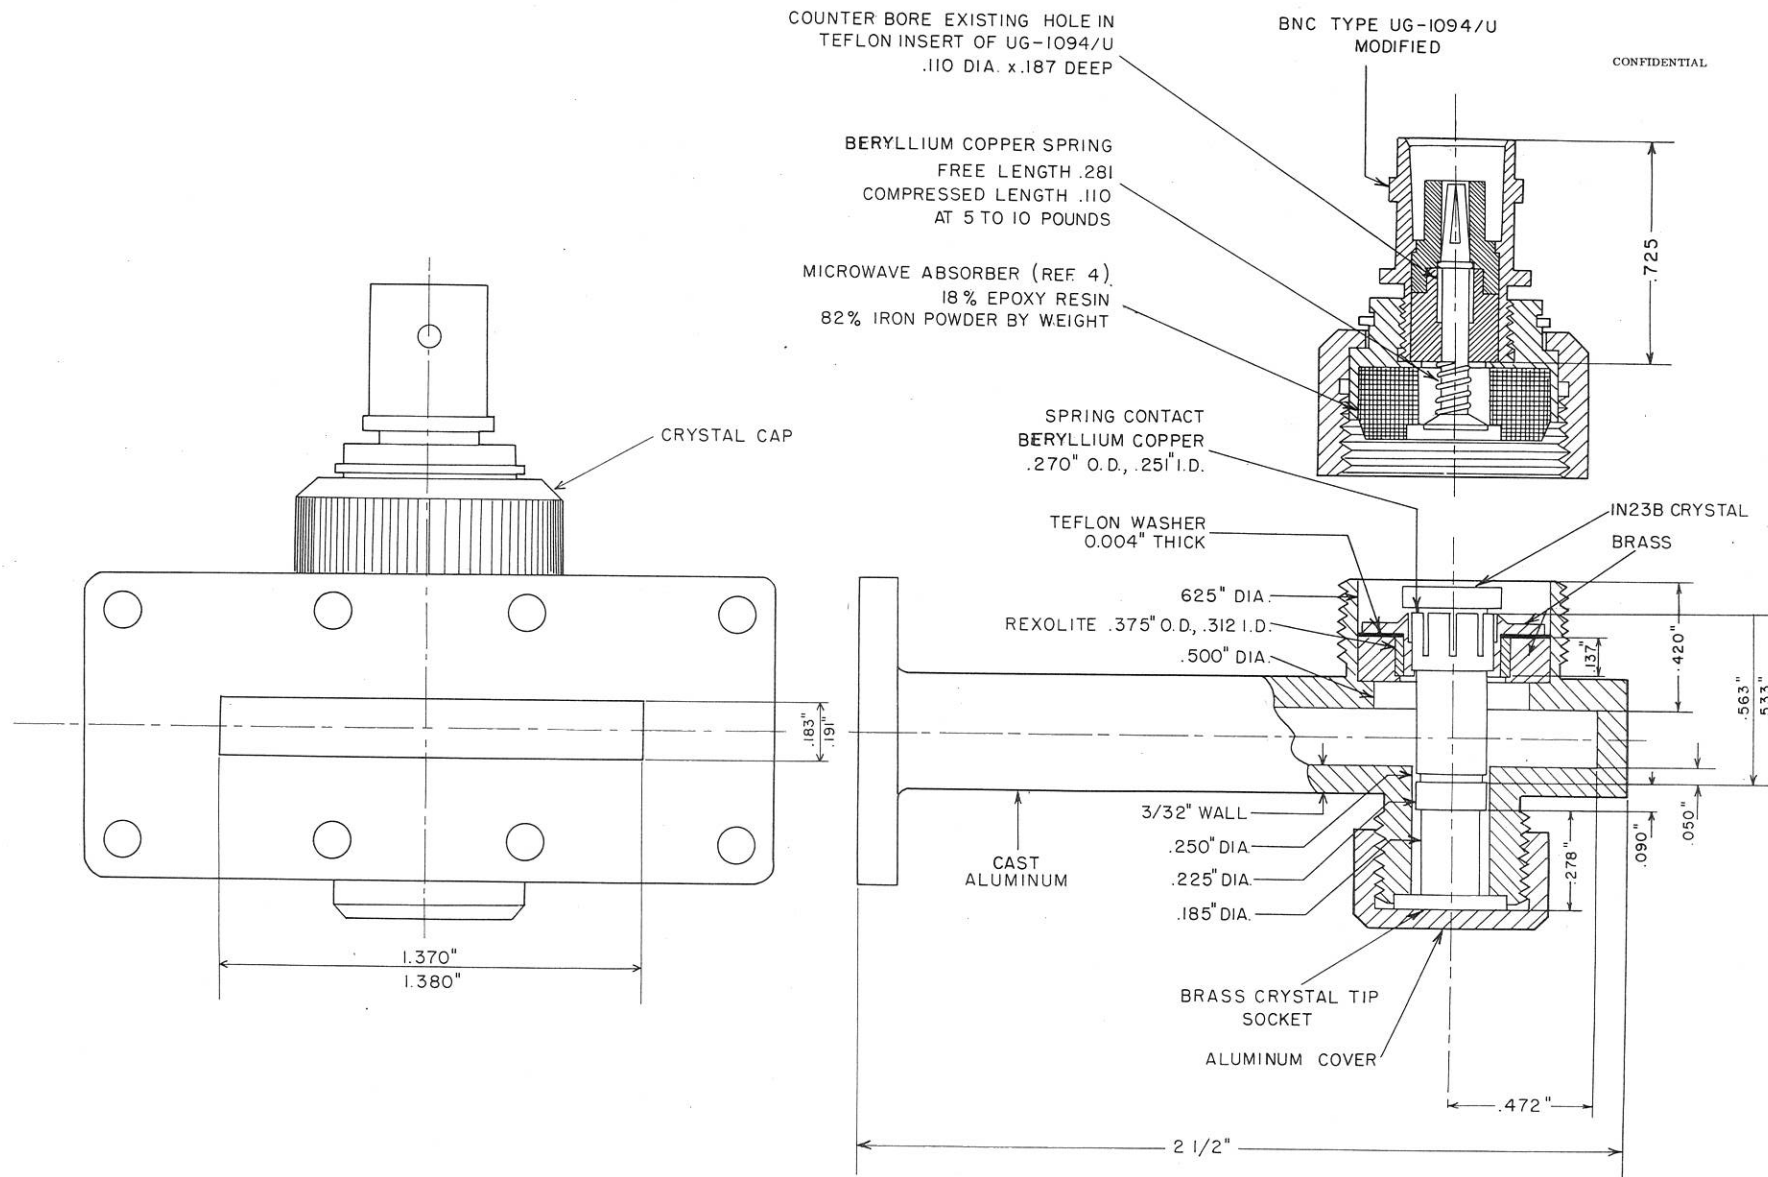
X-BAND CRYSTAL MOUNT — ASSEMBLY
